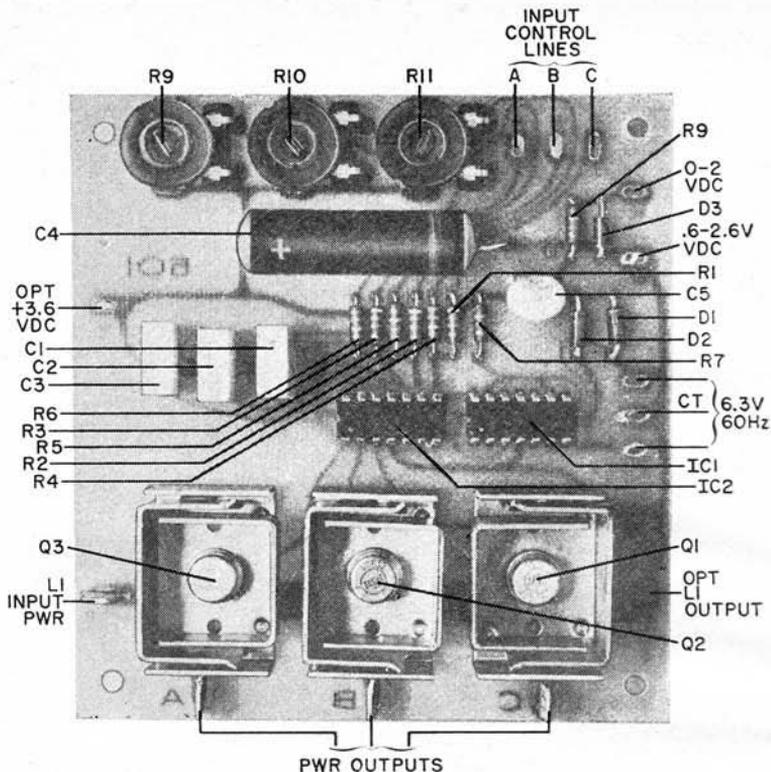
To install the components, follow the arrangement shown here. Soldered-in, slip-on power terminals are to be used for the output.
